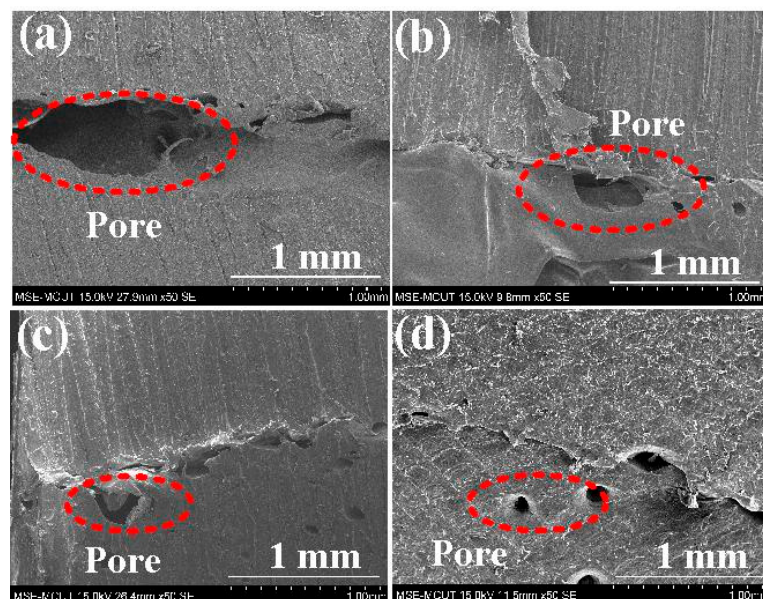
SEM micrographs of fracture surfaces of welded parts for RFW at (a) 1000, (b) 2000, (c) 3000, and (d) 4000 rpm.
